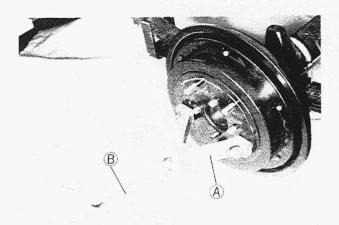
(A) Special tool (Brake drum remover 09943-35511)
